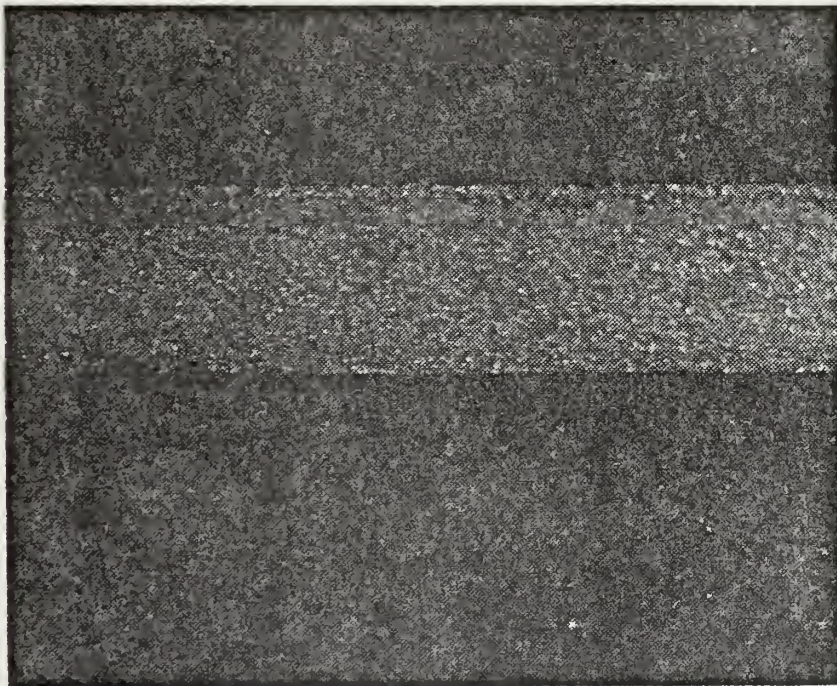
Macro-fractograph of a specimen QT-0-8, fractured after 5,500 cycles at 100 ksi, showing a flat but coarse fracture surface. X10.
